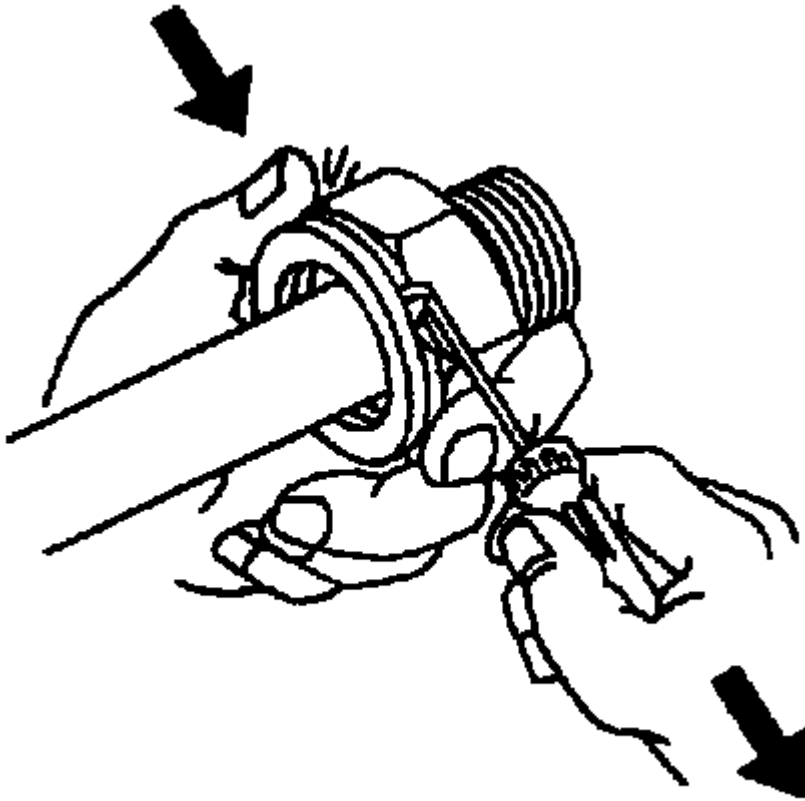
Removing Retaining Ring For The Quick Connect Fitting
